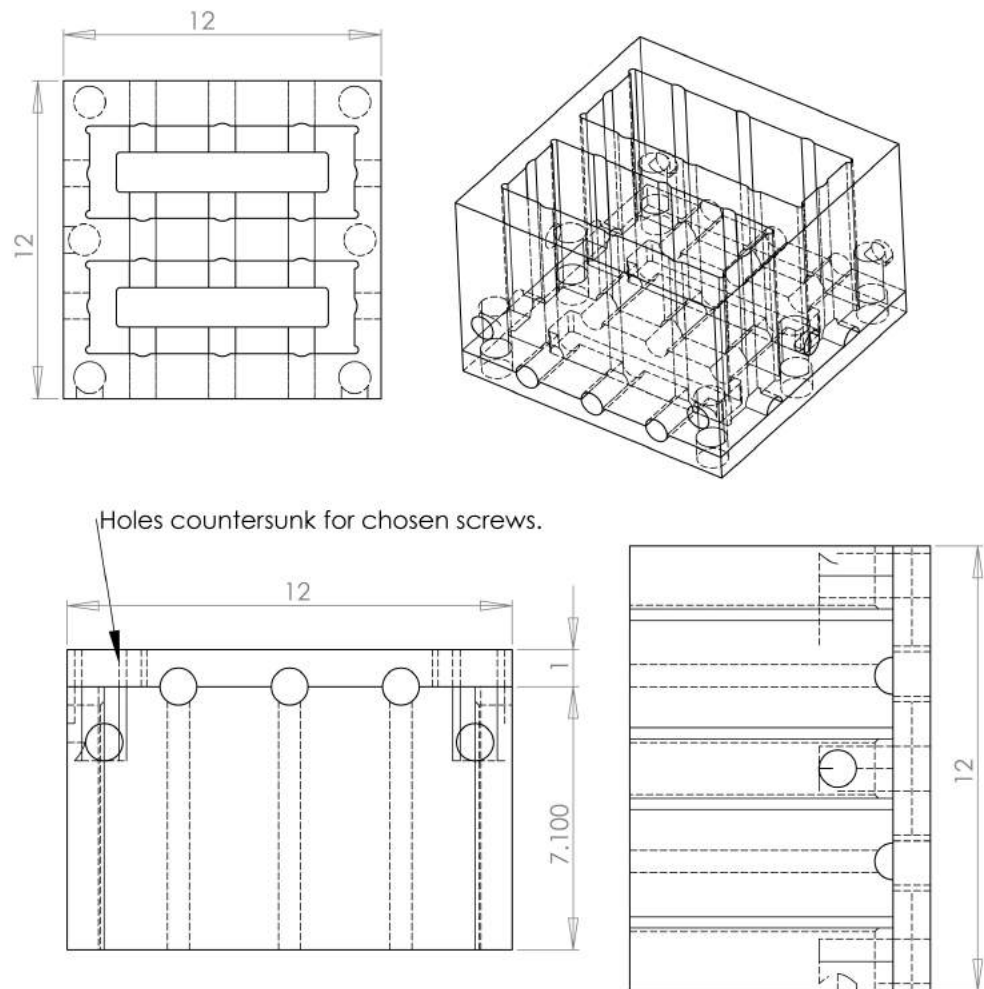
An assembly drawing of a magnetic spacer comprised of the figure-eight and bottom parts shown in Figures B.38 and B.40 respectively.
